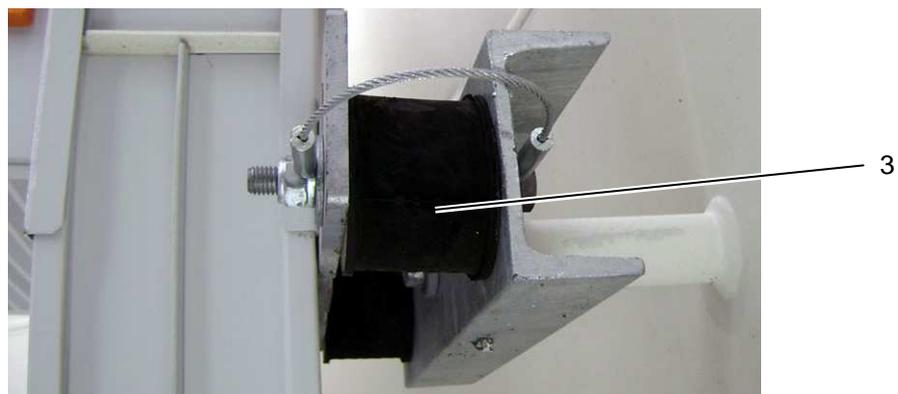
2 Connection between the conductor rail and the tower
